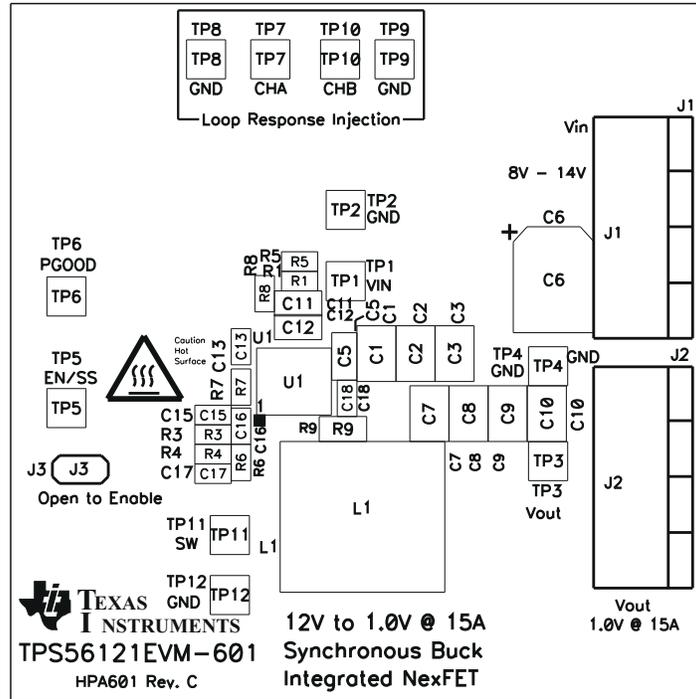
TPS56121EVM-601 Top Assembly Drawing (top view)
